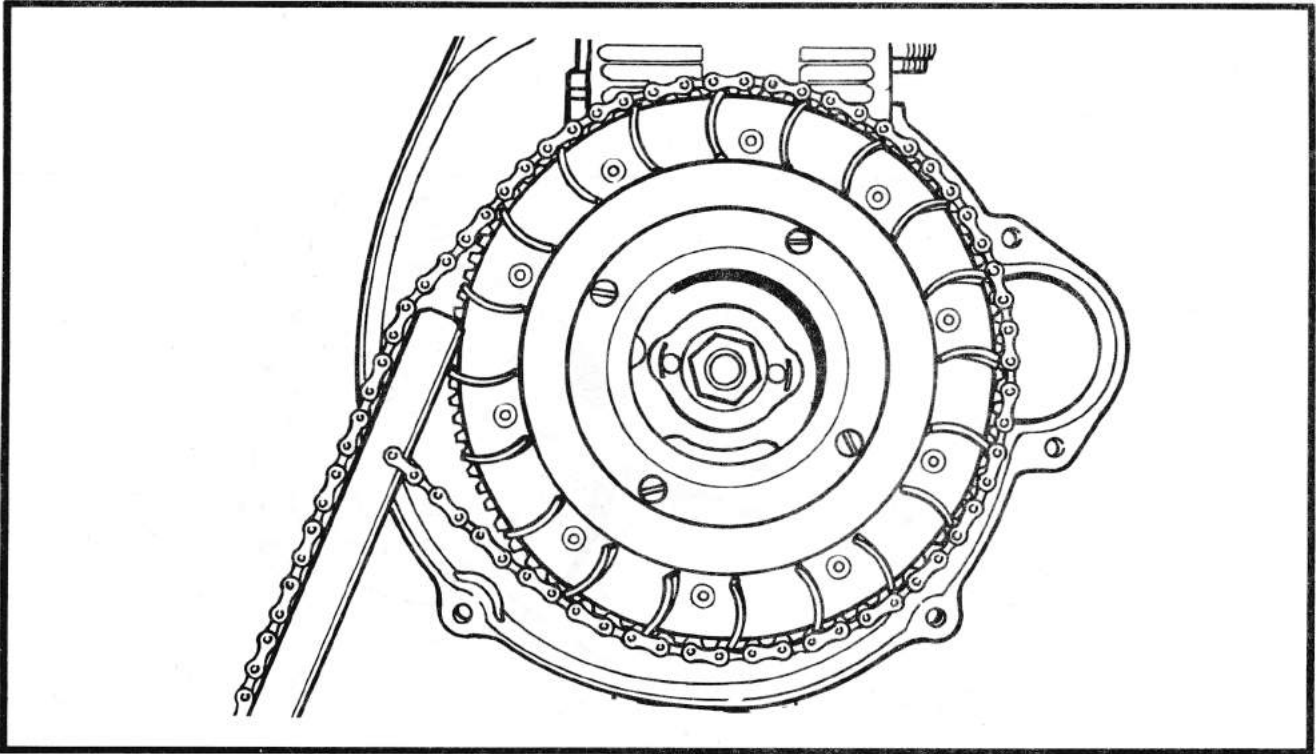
HOLD FLYWHEEL WITH CHAIN CLAMP WHILE REMOVING FLYWHEEL NUT
